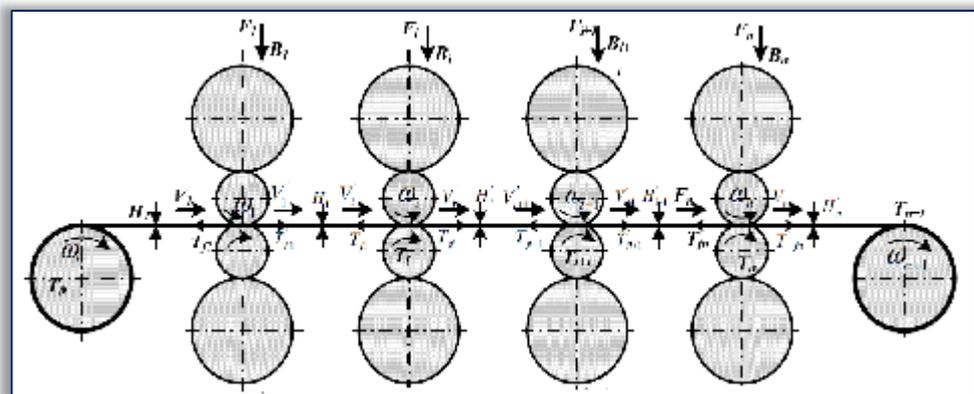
Scheme of multistage tandem strip for continuous cold rolling of sheet metal
